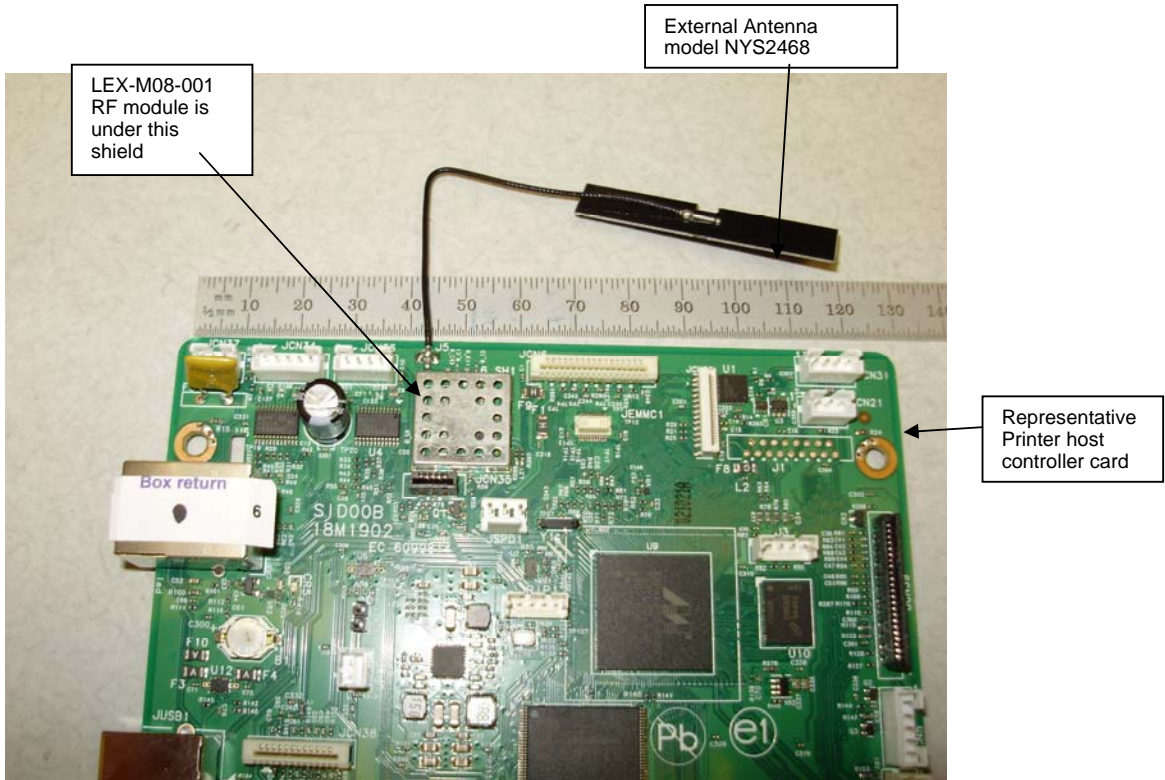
shows the LEX-M08-001 module soldered to a representative host controller card under the external shield soldered over the LEX-M08-001 module. The External Antenna model NYS2468 is shown soldered to the host PCD and is connected through impedance matching components and traces to the LEX-M08-001 module.
